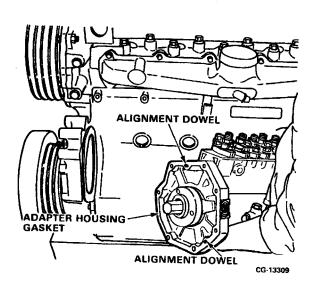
Install Injection Pump and Adapter Housing Assembly to the Front Plate
